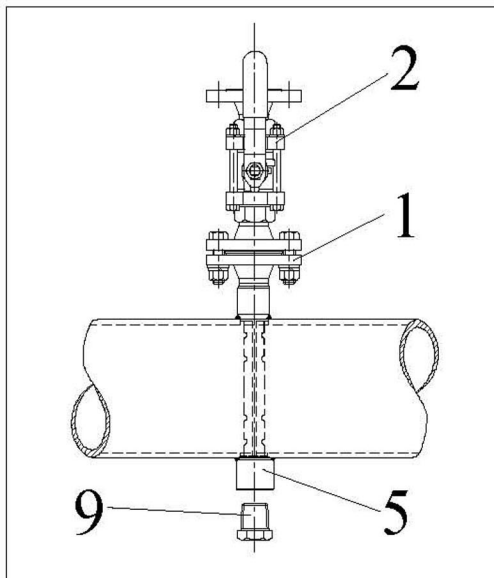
Installation hardware and sensor end support (1" NPT sealing plug)
